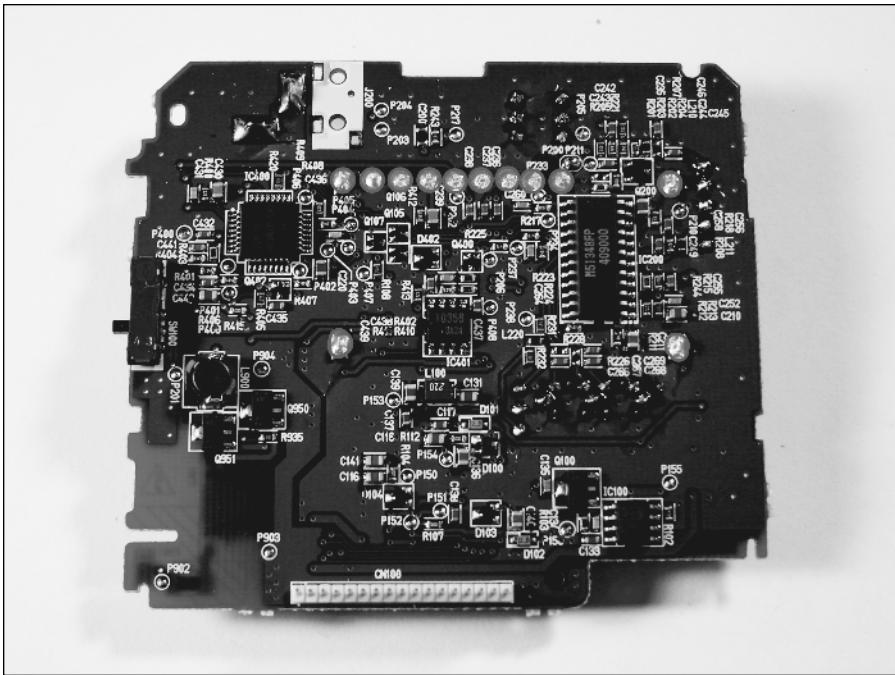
Desolder these leads to remove the TV tuner box.
